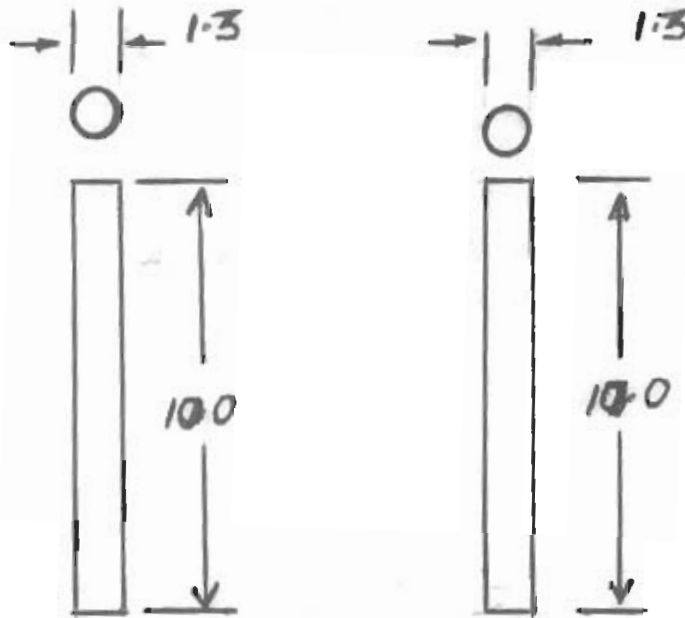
INSULATING STANDS CONSTRUCTED WITH DIMENSIONS IN Cm
